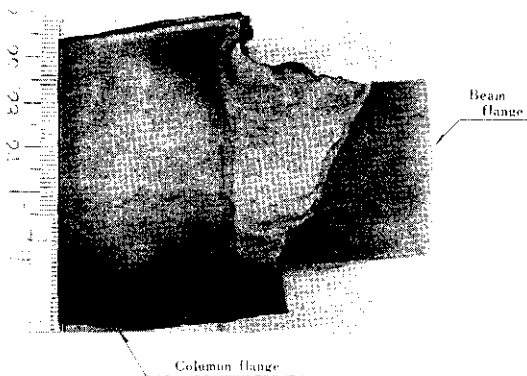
Macrostructure of butt welded joint (Beam to column, CO₂ welding)
